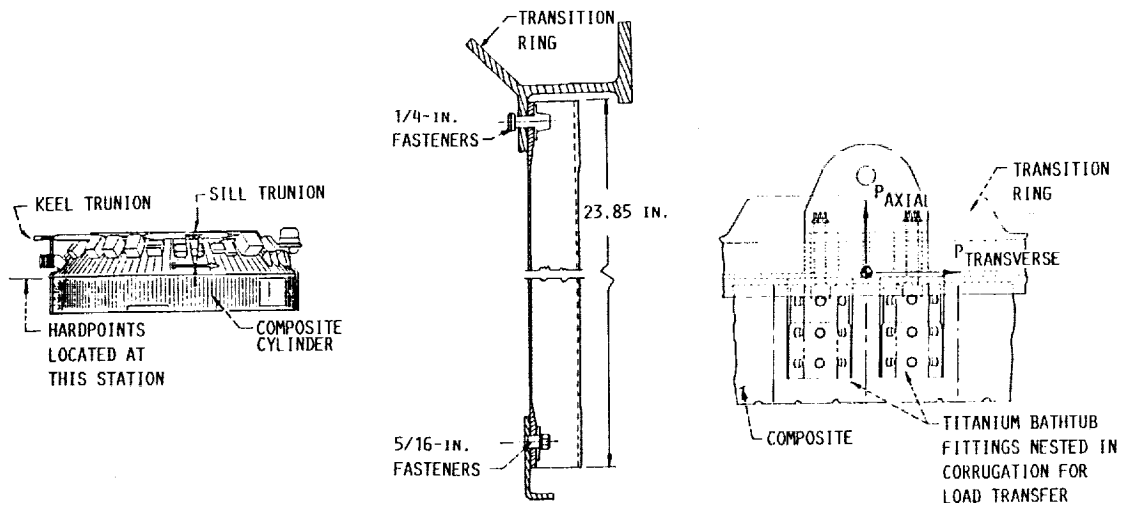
G vehicle forward adapter 22-hardpoint design (0.06-in. base laminate, 0.203-in. maximum buildup, 25 hardpoint attachments (22 payload truss, 2 sill drag strut, 1 keel drag strut)).
